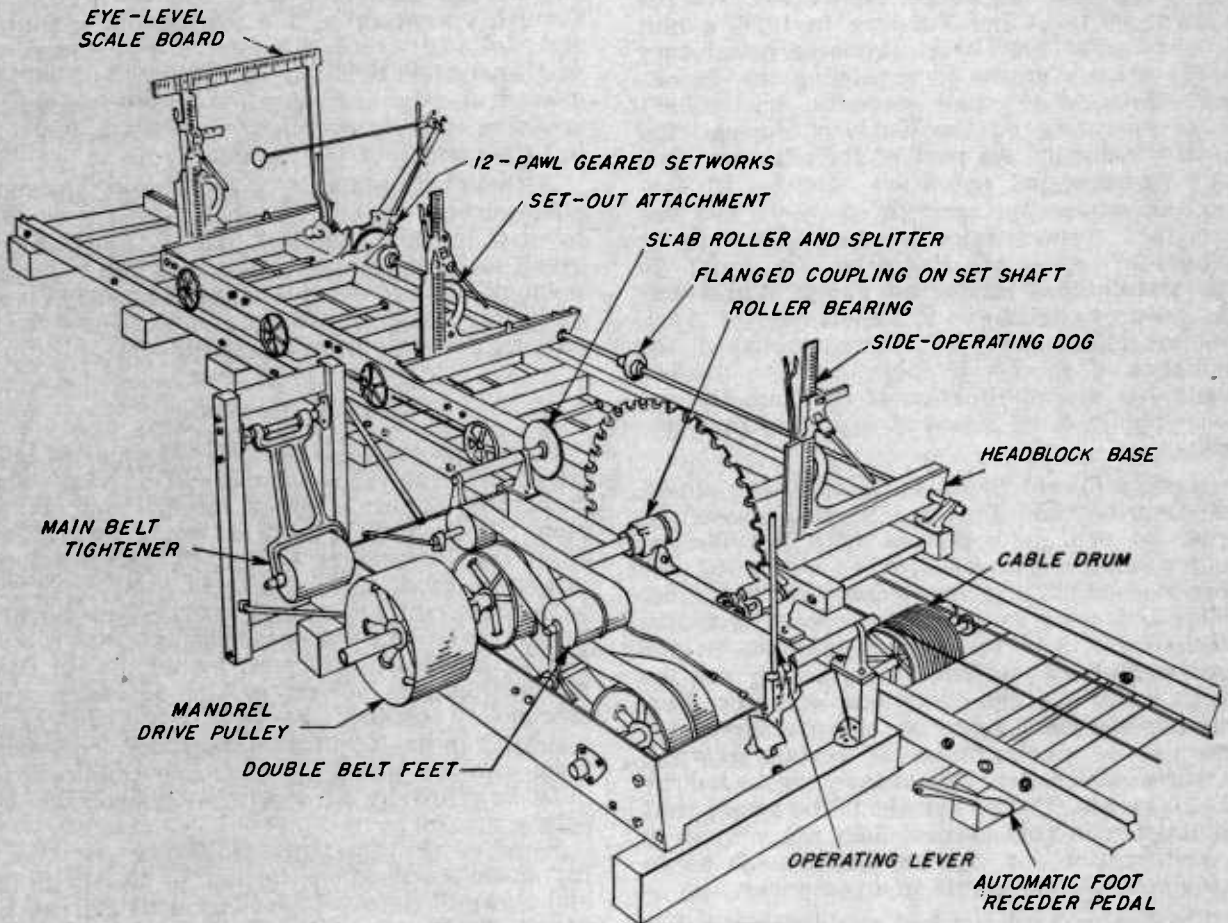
Small circular sawmill equipped with headblock type of small-mill carriage.
